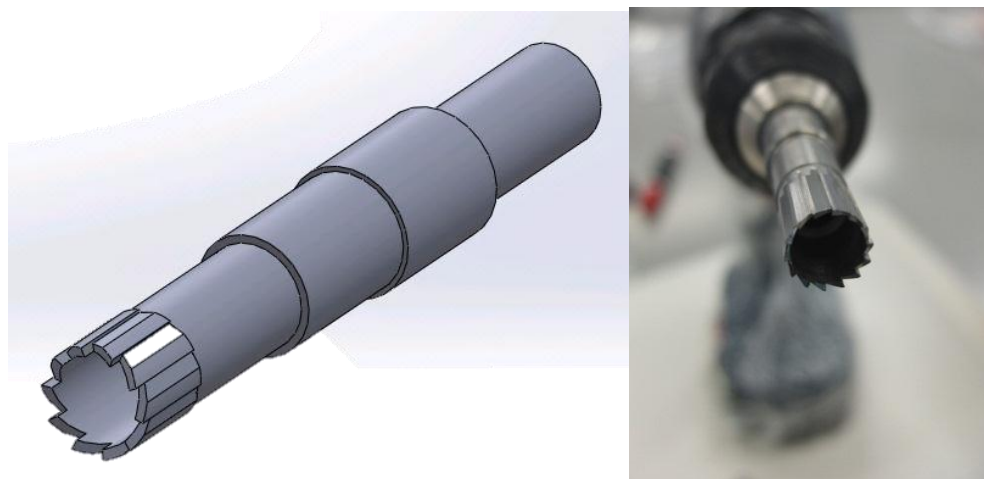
Left: Schematic of a bone corer with serrated cutter teeth (lower portion) and internal diameter of 9mm used for removal of bone plugs. The smooth end (upper portion) was used to fix to an electrical drill. Right: The bone corer attached to a drill for removal of bone plugs.
